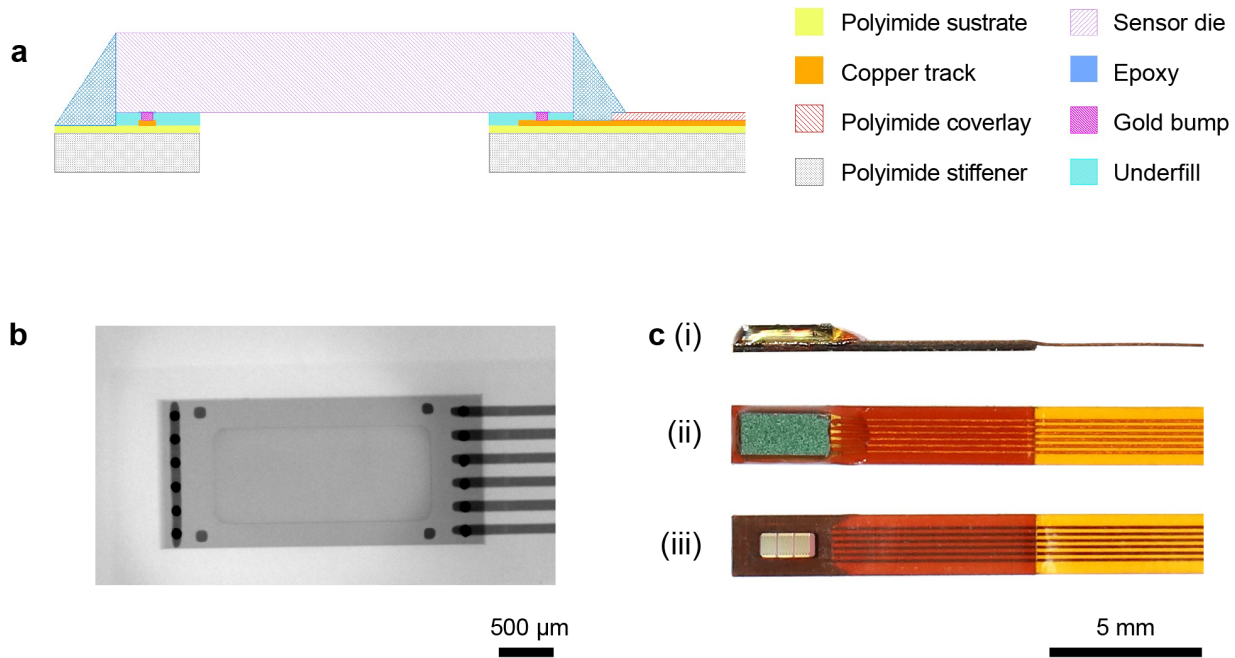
Flip-chip assembly and moisture resistant packaging. (a) Schematic cross-section through the long axis of the sensor, showing bond positions, electrical insulation, and sensor window. (b) Microfocus radiograph showing assembled device after flip-chip bonding. (c) Photographs showing the completed FCOF package.
